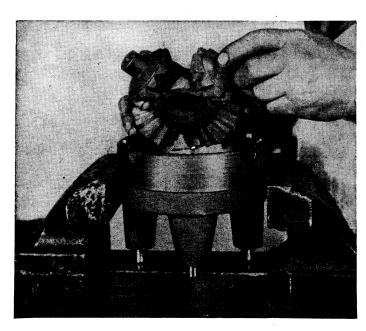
Slip differential side pinions off spider arms. Take out short hub side gear (left hand) and remove thrust washer
